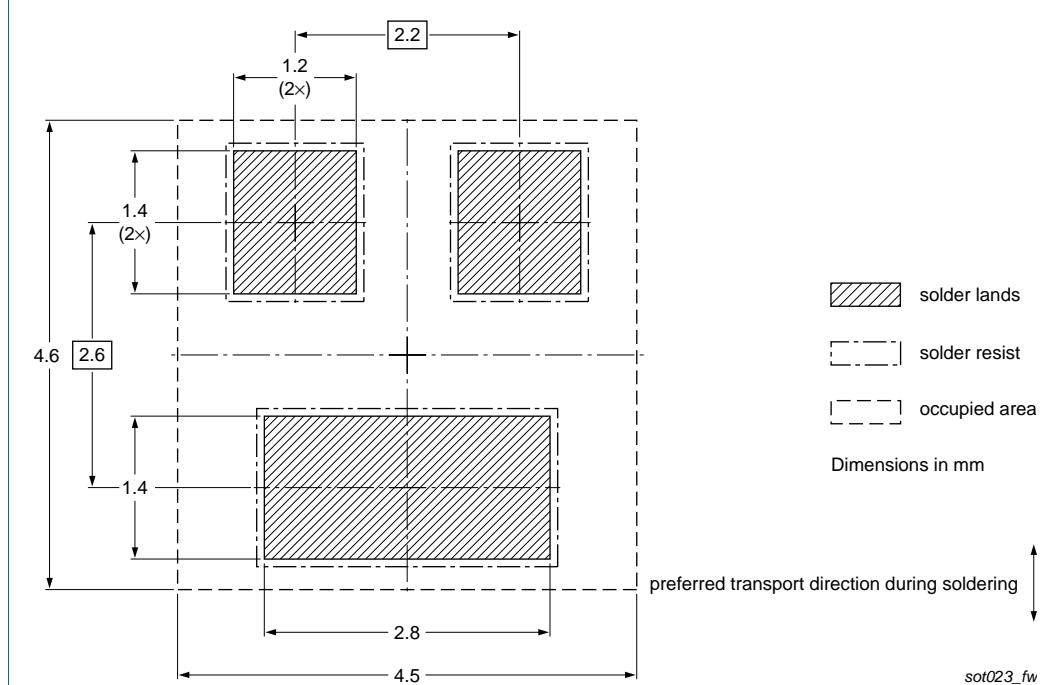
Wave soldering footprint PDTC123JT (SOT23)
